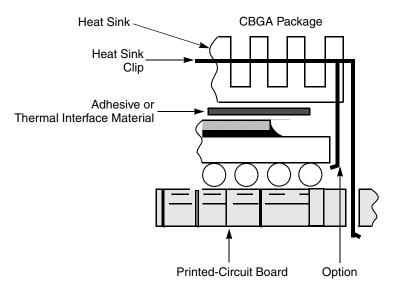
Package Exploded Cross-Sectional View with Several Heat Sink Options
